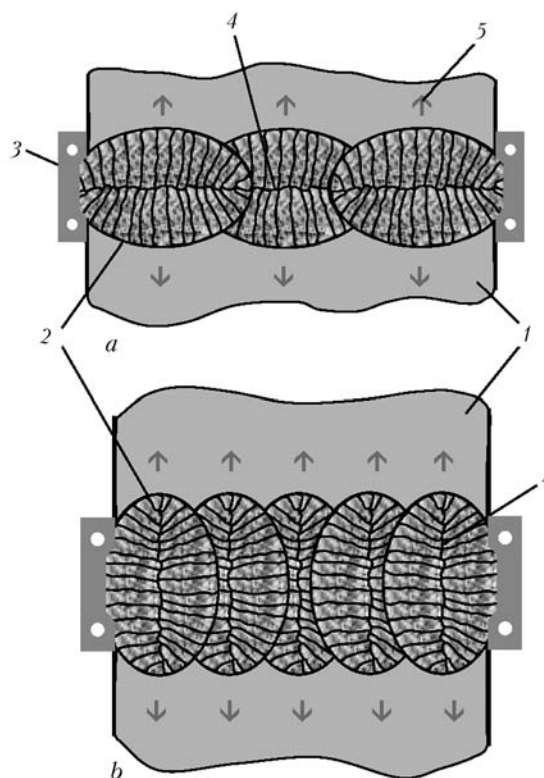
Schemes of positioning of zones (planes) of weakness in metal of layers of multi-layered weld in ESW with consumable nozzle with arrangement of consumable nozzles along the axis of edges preparation (*a*) and across (*b*): 1 — edge being welded; 2 — shape of layer of a weld in a cross section; 3 — forming cover plate; 4 — weakness zone (plane); 5 — vector of shrinkage forces
